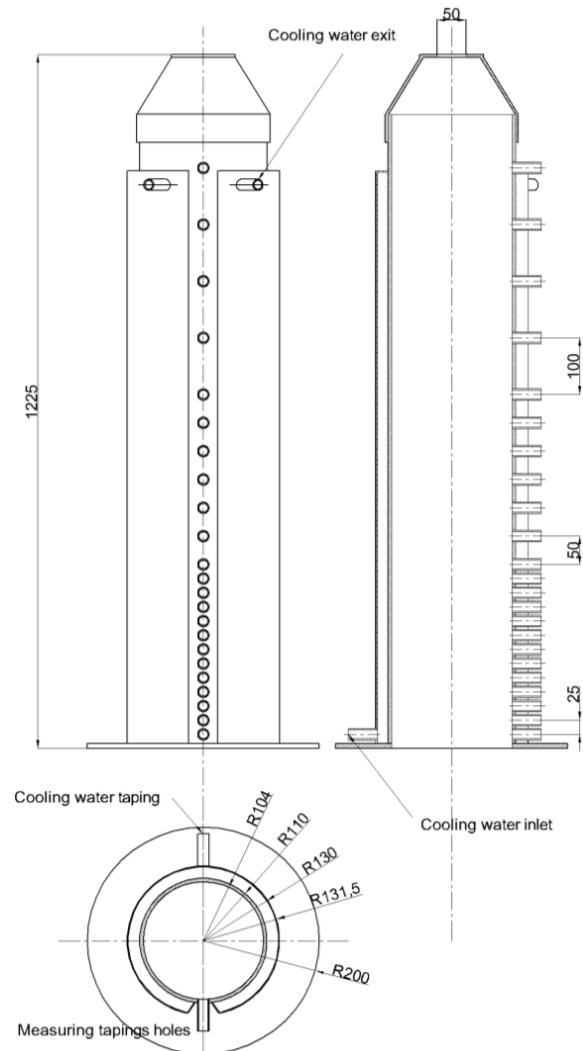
Combustor dimensions and tapping ports, (Dimensions in mm)
